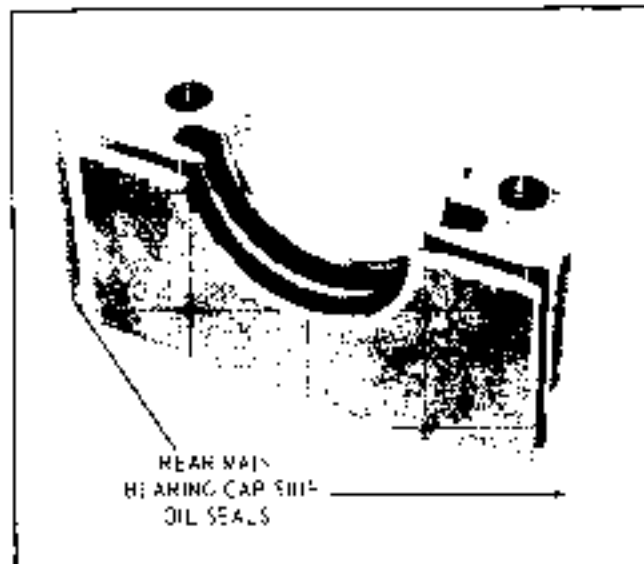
Rear Main Bearing Cap Side Oil Seals
